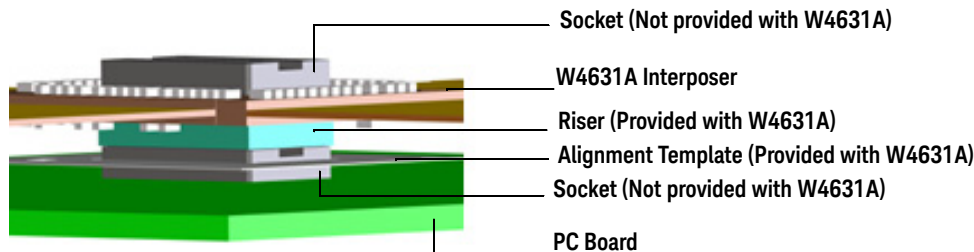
PC board, riser, optional Grypper sockets, and interposer stack up
